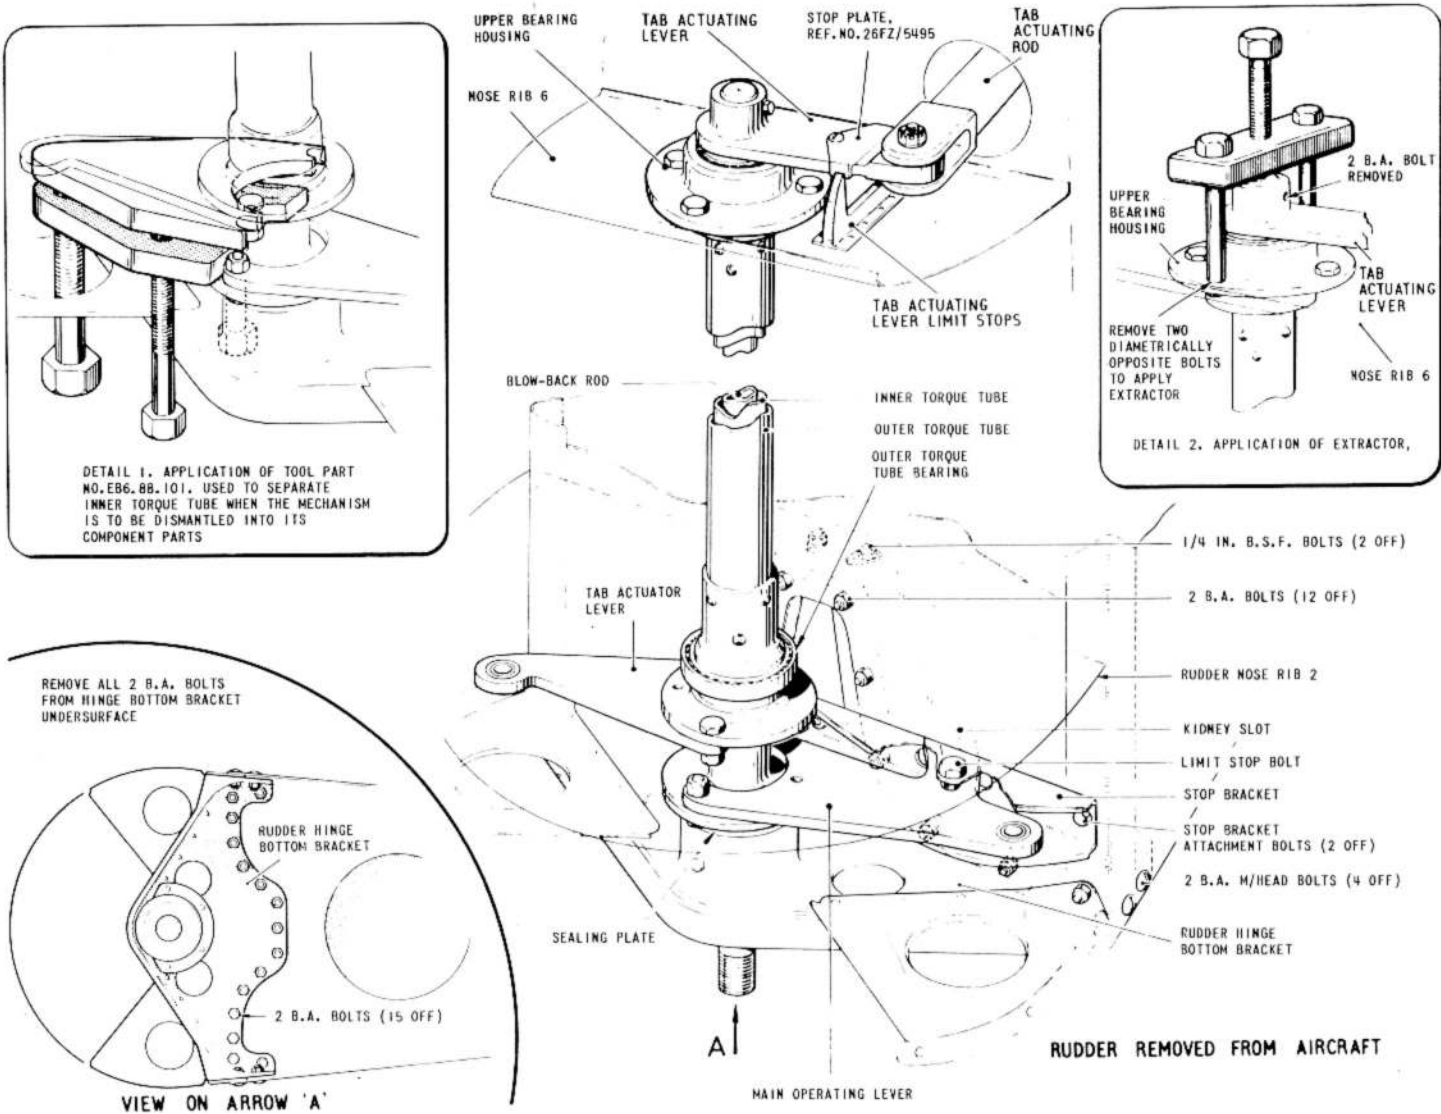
RUDDER SPRING TAB MECHANISM REMOVAL
